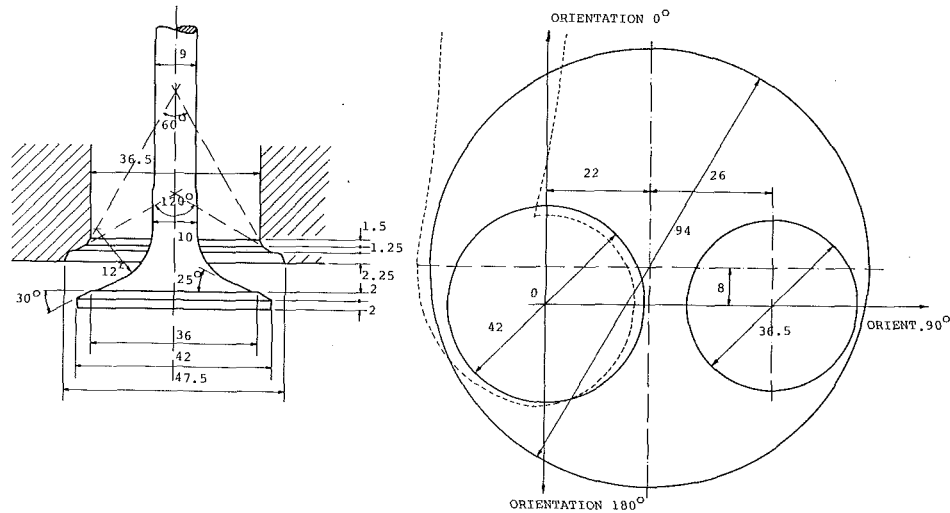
Intake valve and cylinder head geometry. Definition of measurement planes.
